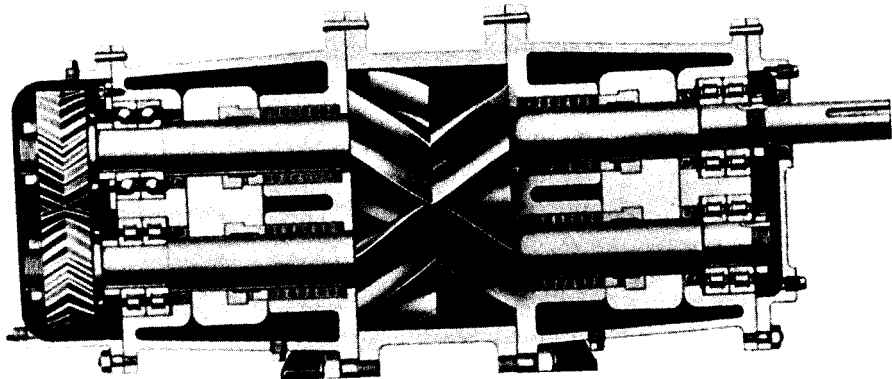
External gear pump with external bearings and timing gears. Courtesy Imo Pump-Warren.
